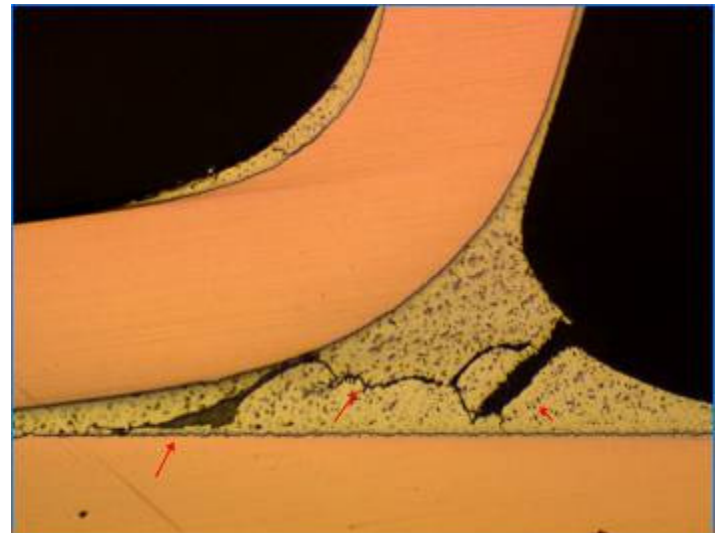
cross section, SN62, U31, left lead solder crack, 200x, a
